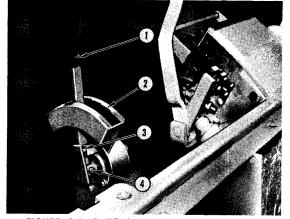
SHIFT QUADRANT (POWER SHIFT)
